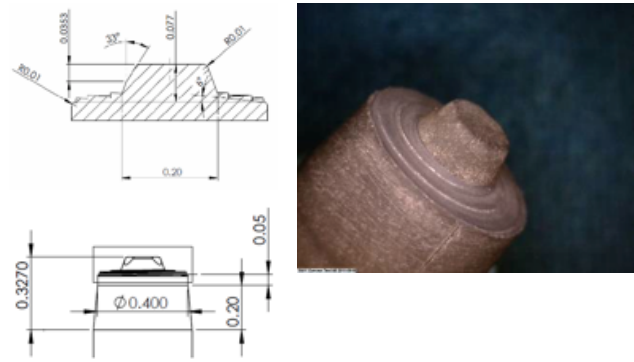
FSSW tool geometry of convex shoulder tool (SN11).
